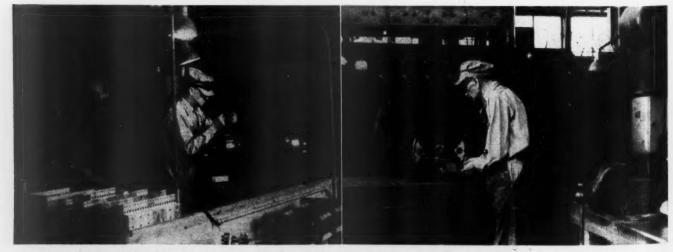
(left)—Overhaul bench for reversers, cam switches, auxiliary generators and air cylinder assemblies. Fig. 7 (right)—Voltage regulator test stand
